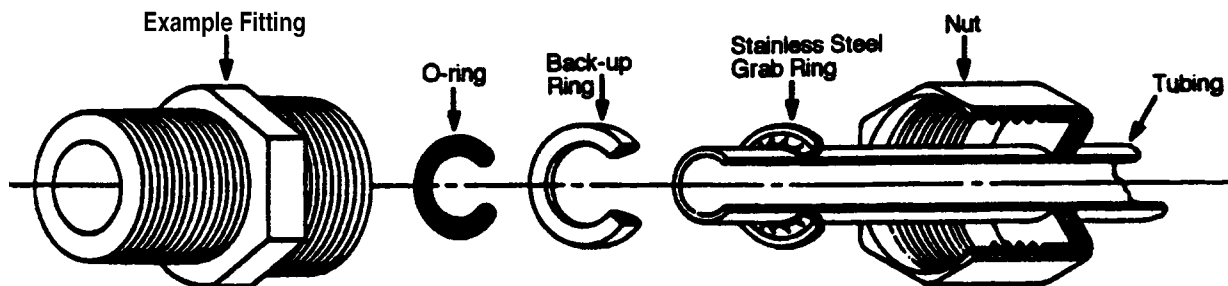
Typical Polypropylene Tubing Adapter Installation
